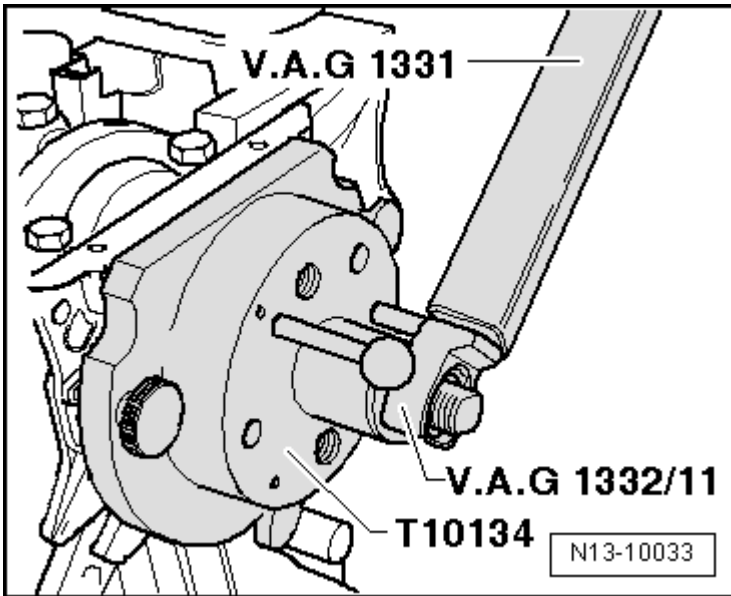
Identifying Sensor Wheel Pressed With Assembly Tool T10134 Onto Crankshaft Flange
